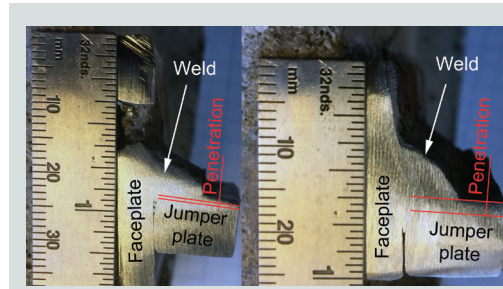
Weld penetration between jumper plate and faceplate.
